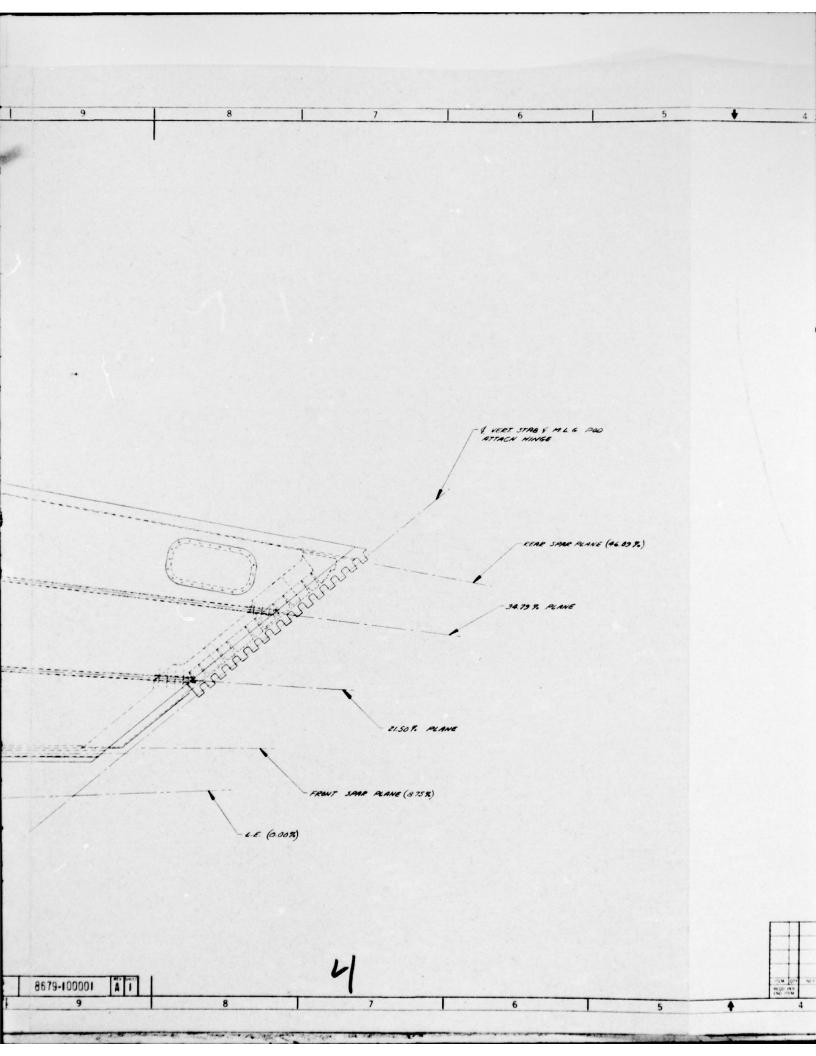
(Dwg. 8679-100001, 3 sheets) illustrates the complete wing structural arrangement as an extension of the test section described in Section B-1. These drawings illustrate the complete wing including access doors, tip rib, and provisions for attaching leading and trailing edge structure.
